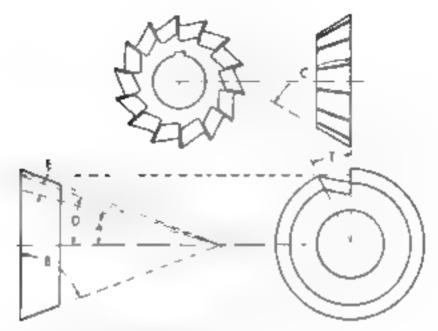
Angles involved in calculation for determining position of dividing head when milling teeth on angle cutter
